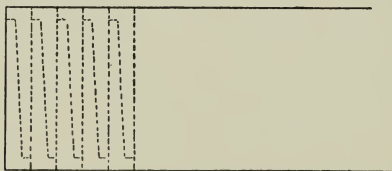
Showing how Floor Brads are stamped out of sheet iron.
